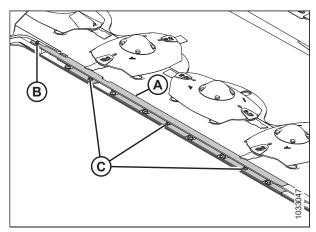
Left Cutterbar Deflector – Behind Cutterbar
